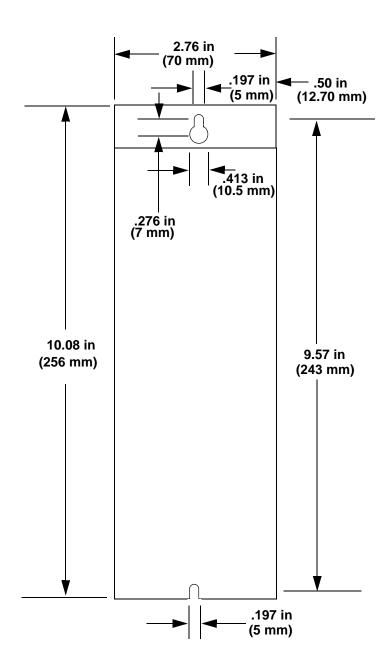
3, 6, and 12 Amp Drives - Front View
